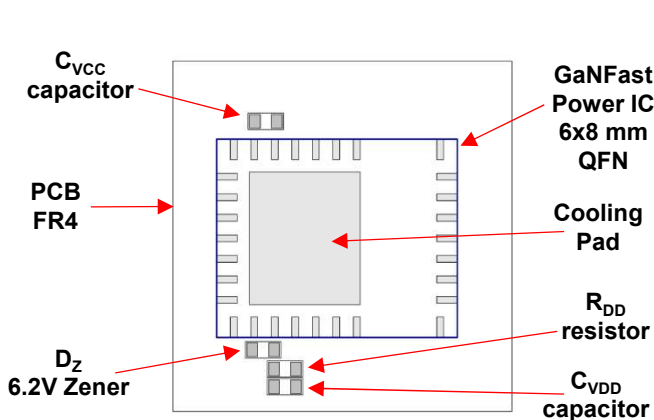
6x8 mm PQFN package and simplified schematic with cooling pad
